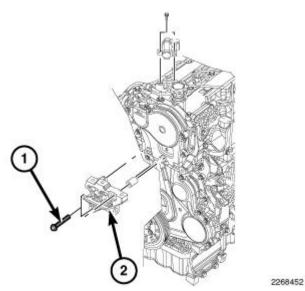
Inner Engine Mount Bracket Courtesy of CHRYSLER LLC
